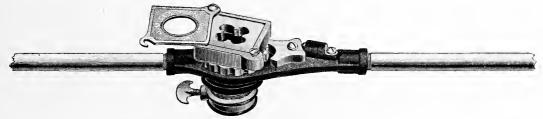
MILLER'S REVERSIBLE RATCHET DIE PLATE.
